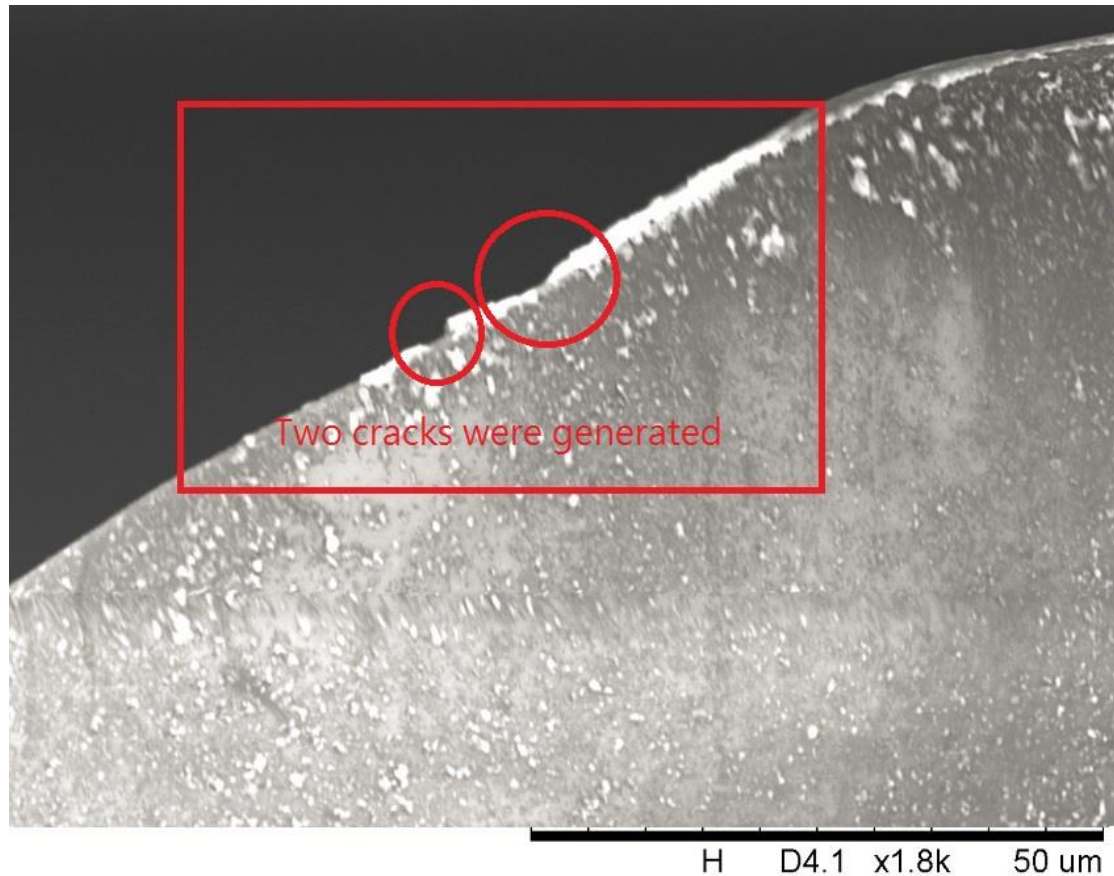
The closer view of defected area of cutting edge in Figure 3(d)
